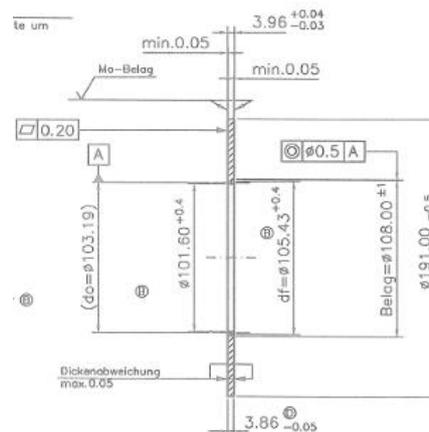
The tolerance of thickness specified in the technical documentation
